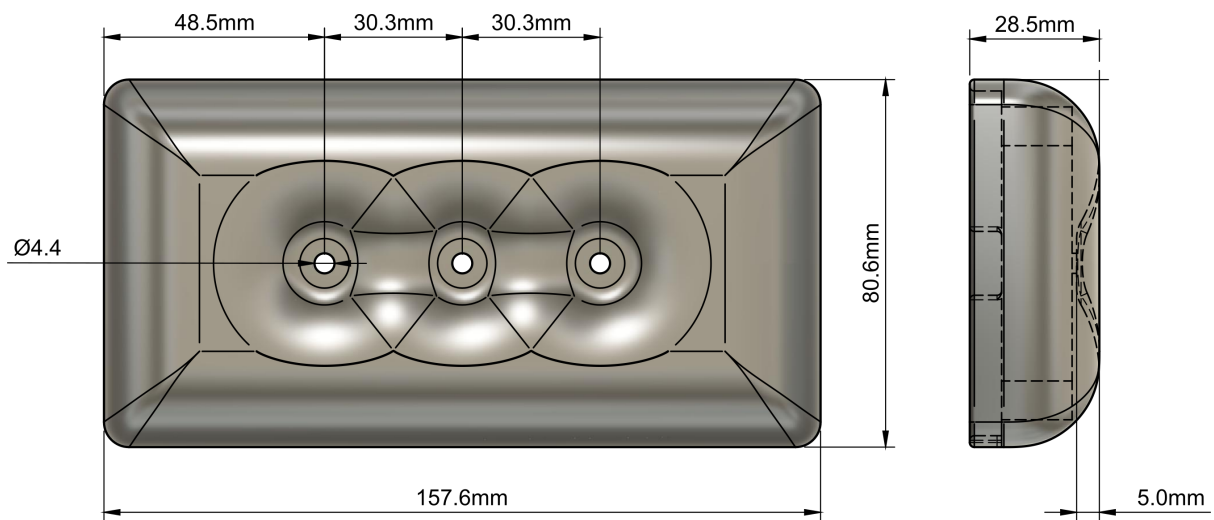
Technical drawing of the top and side view of our interface to show dimensions and the chosen pin layout.
